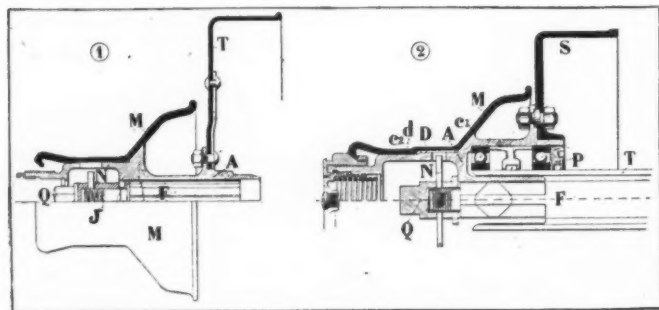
Mounting of the fixed hubs in R.A.F. demountable wire wheels on different wheel-driving shafts—(1) on a non-floating type of shaft—(2) on a full-floating type of shaft
